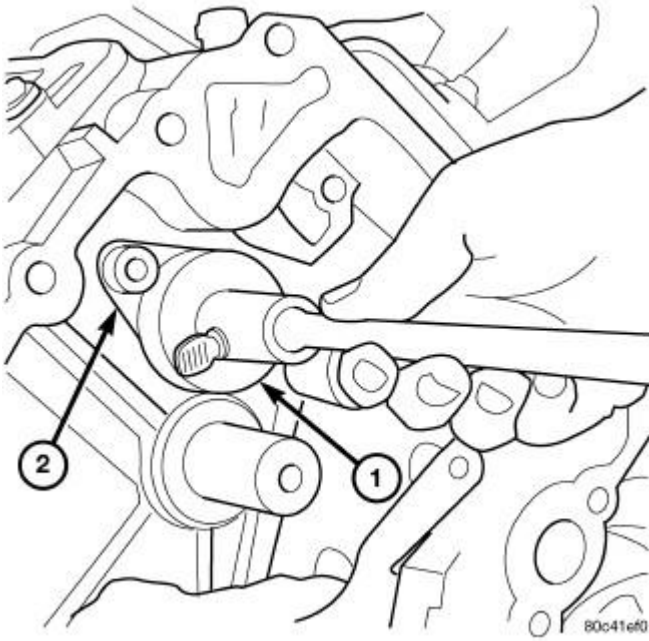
Removing/Installing Counterbalance Shaft From Engine
